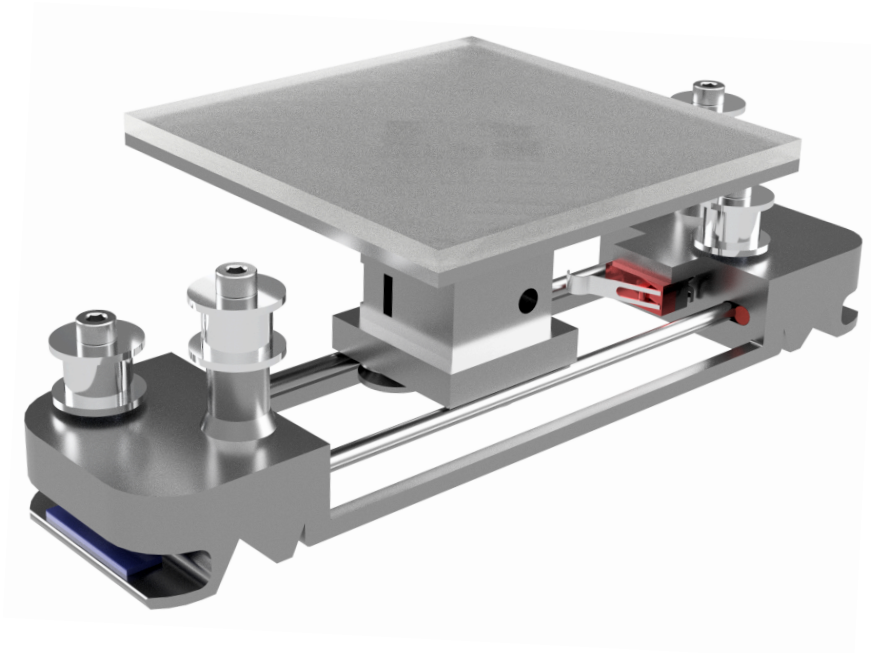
Isometric Rendering of the Fully Configured V-Groove Printer Gantry
